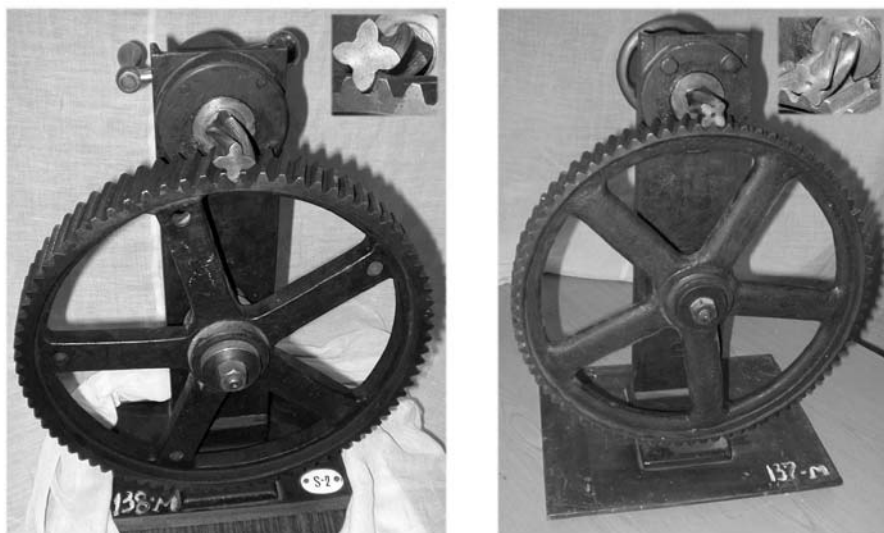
Cylindrical helical involutes tooth gearing with $z_1 = 4$ and $z_2 = 80$
